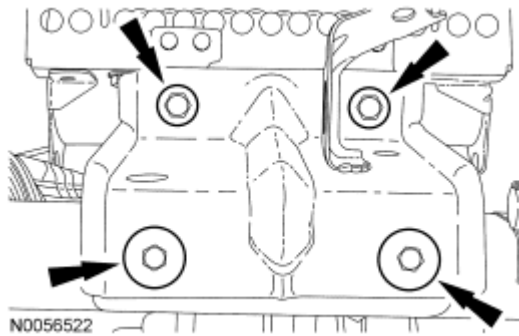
Locating Bolts On Passenger Air Bag Module Support Bracket
